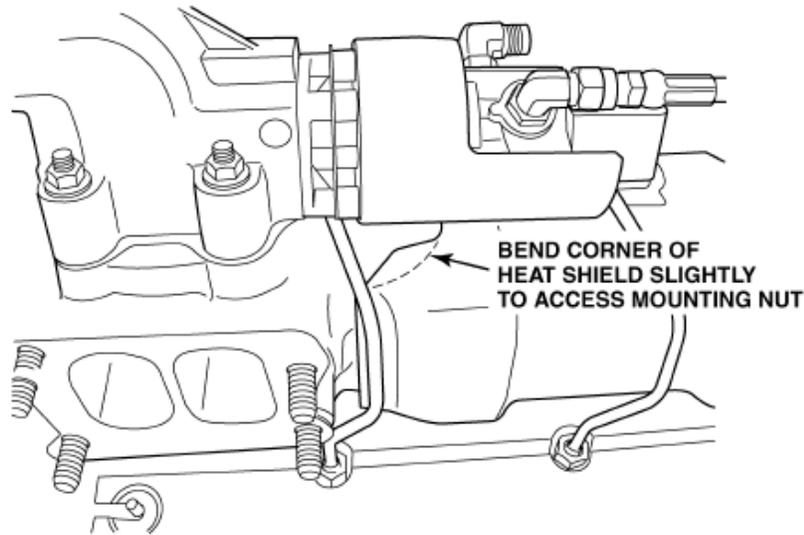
Exhaust Manifold Heat Shield (Shown with Turbocharger Removed for Clarity)
